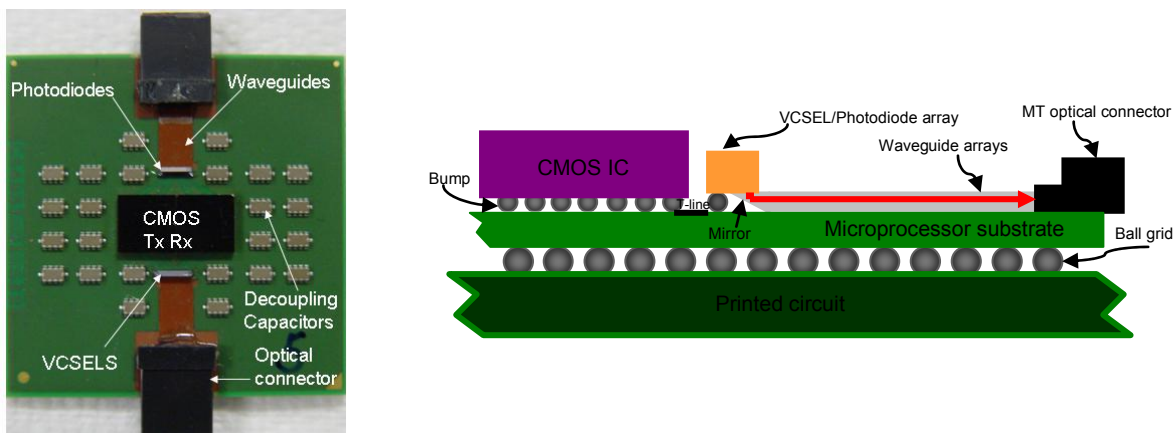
(a) A fully assembled optical transceiver unit (b) a side view of optical coupling of lasers/photodetectors to waveguides through a 45 degree mirror.
